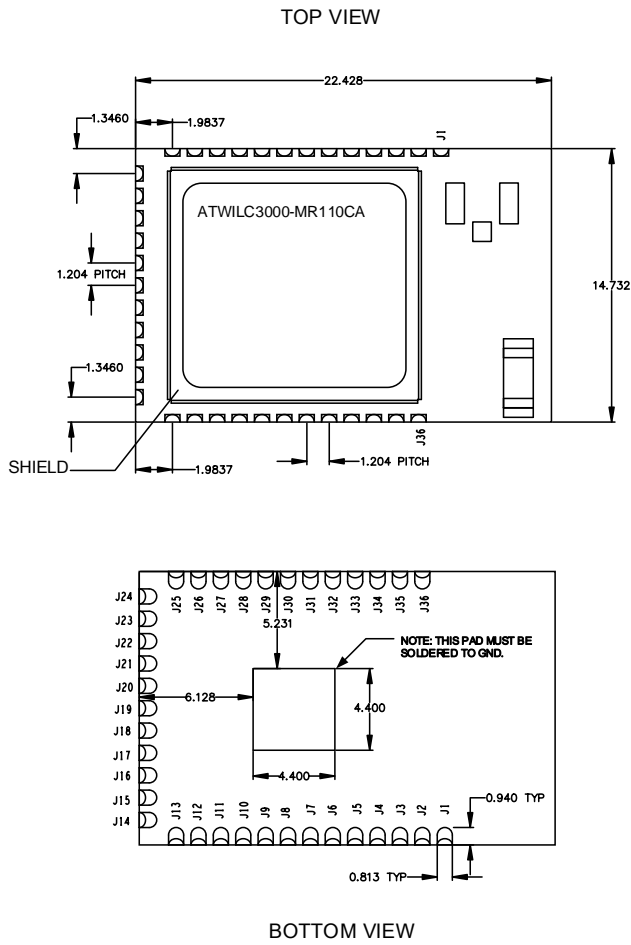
provides the package dimensions and Figure 3-3 provides details of the dimensioned layout of the ATWINC3000-MR110CA module.
